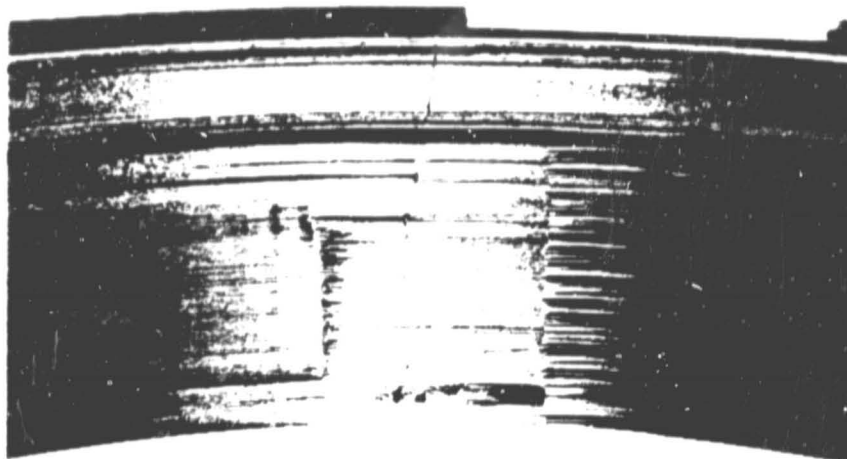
Damaged Seal; Inboard Ring - Seal Set No. 4
